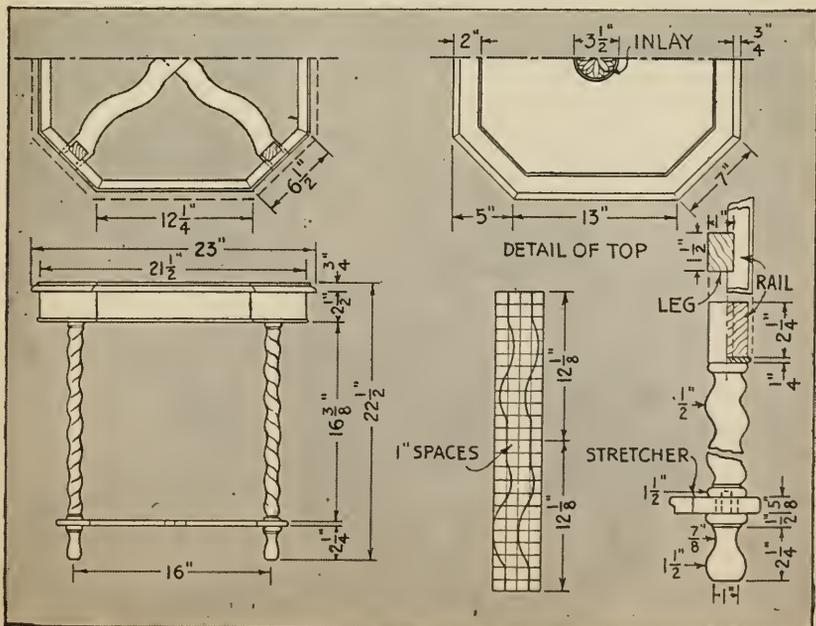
Assembly views and working details of a coffee table that is a typical example of spiral turnings.
